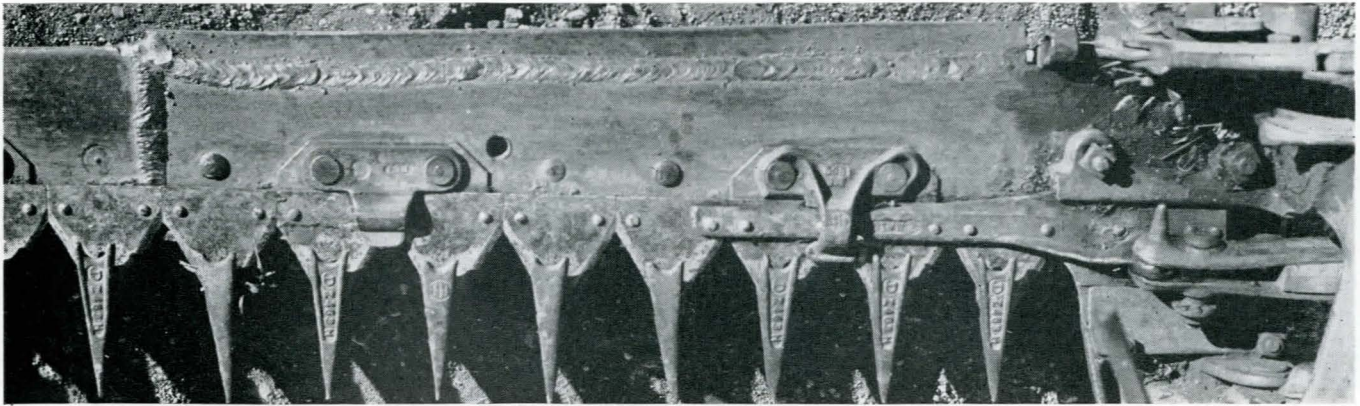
Since many horse mowers have only a 5-foot cutter bar, which is rather short for tractor use, a 2-foot extension can be welded on to make a 7-foot cut. This practice is recommended only when a good welding job can be done by an experienced welder.
